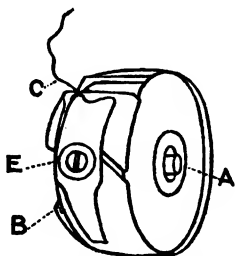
Round bobbin used on all rotating and oscillating machines.
